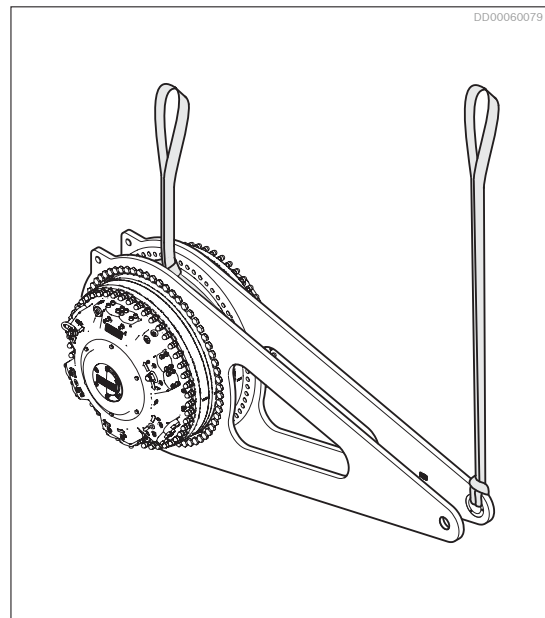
Lifting CBM 5000-6000 and single ended torque arm
